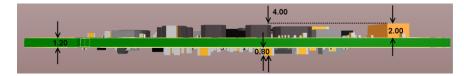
IGEP<sup>™</sup> SMARC iMX6 Lateral view Widths Dimensions
